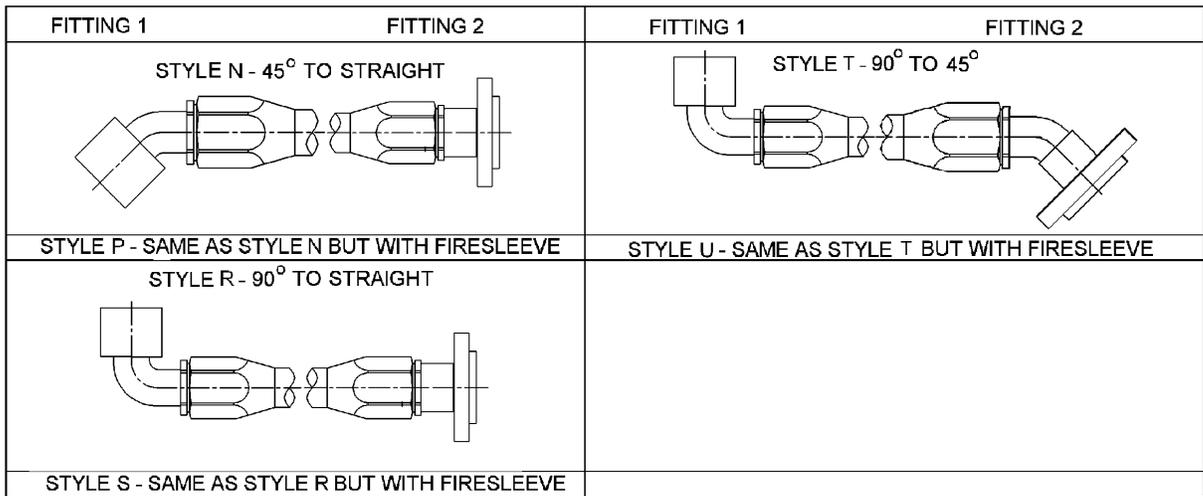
Hose assembly styles, field attachable fittings, flare-to-flange – Continued.
